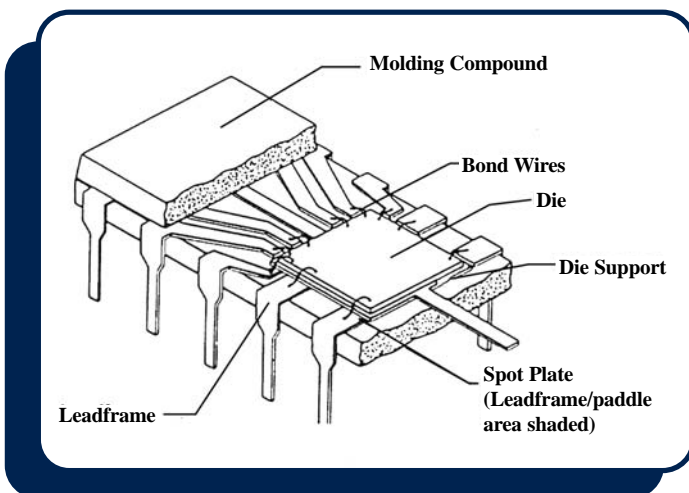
Standard Dual Inline Package (DIP) Cutaway view showing die and bond wires.
